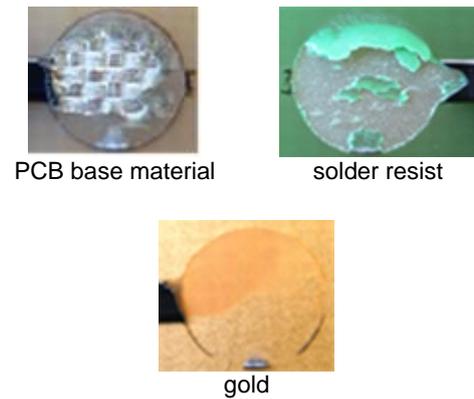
Breakage areas of EMC on different base materials after shear tests of adhesion testing. Cohesion breakage could be observed for PCB base material and solder resist. Adhesion breakage was observed for the gold surface.
